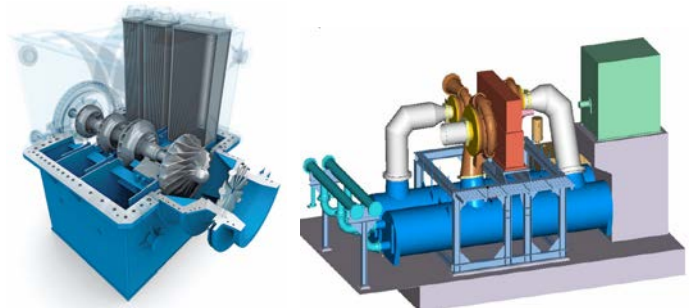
Typical MAC inline isotherm compressor (a) and BAC geared-type compressor (b)
